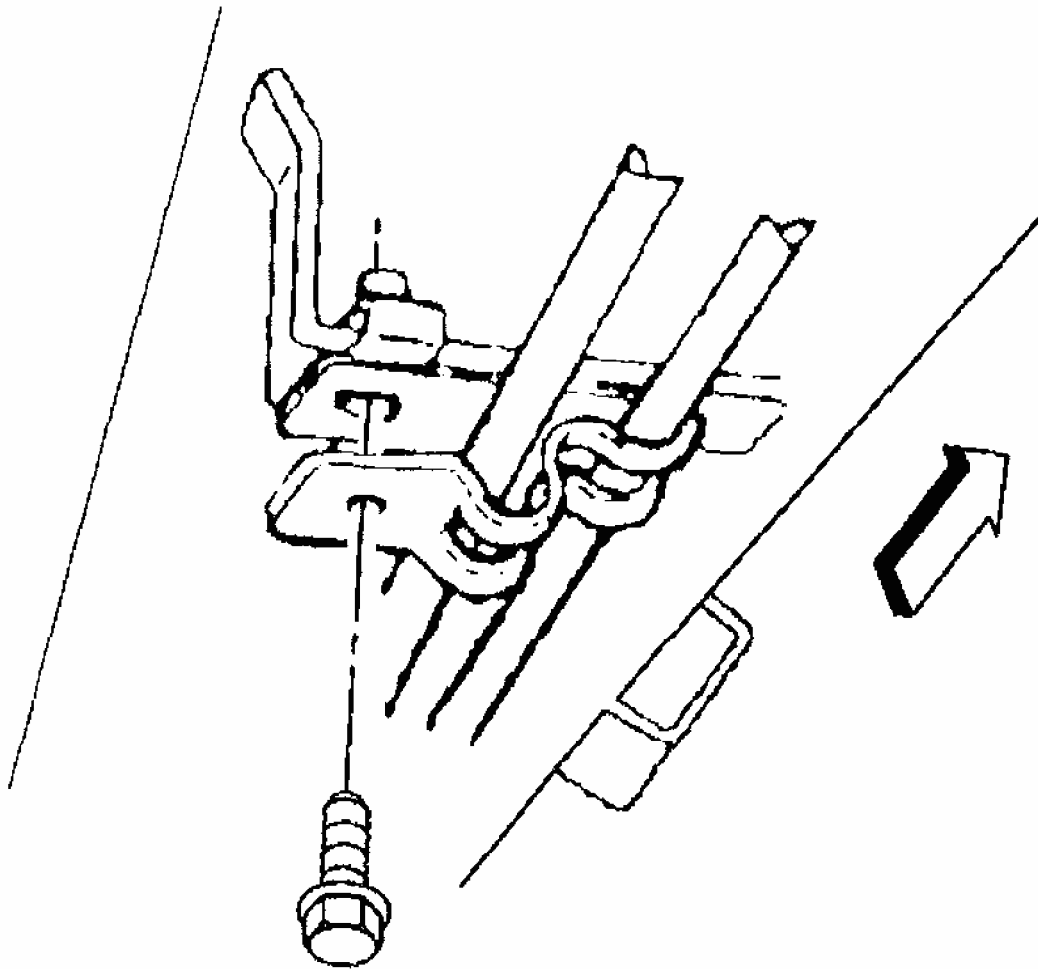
Installing Rear Exhaust Hanger Mounting Bolts
